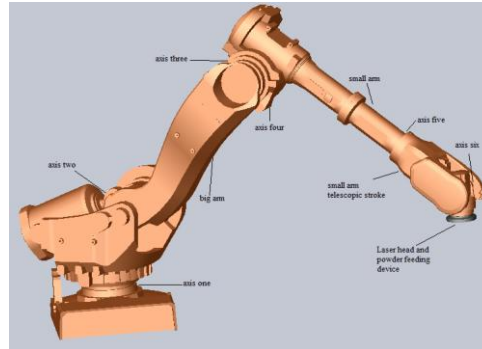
The six-axis LAM robot three dimensional modeling is designed by SOLIDWORKS
